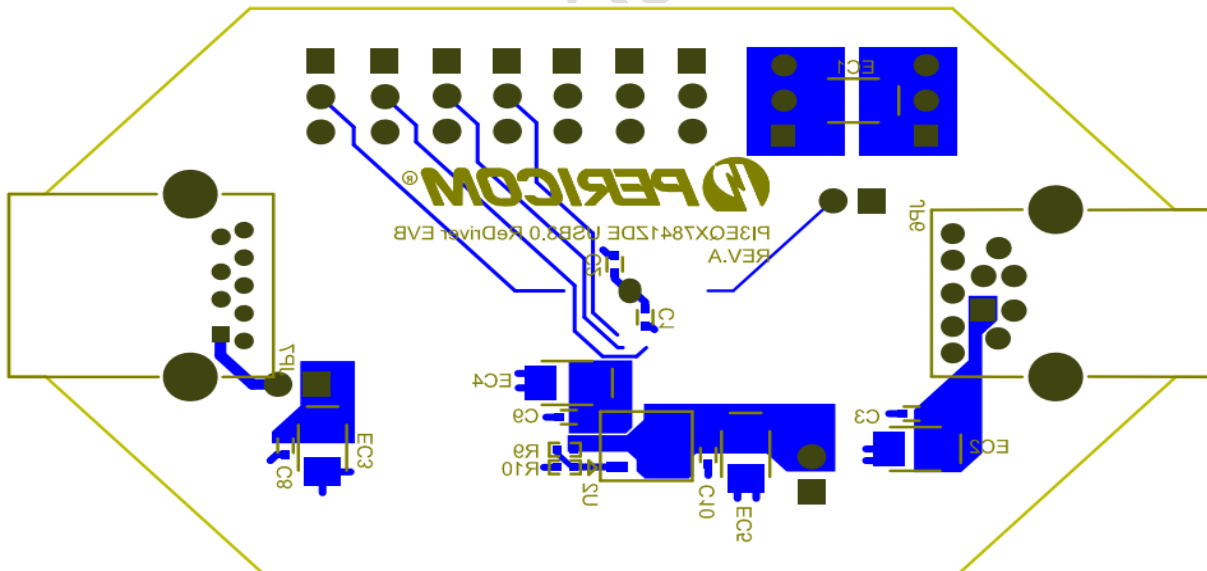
, Bottom view of PI3EQX7841 EVB Layout
